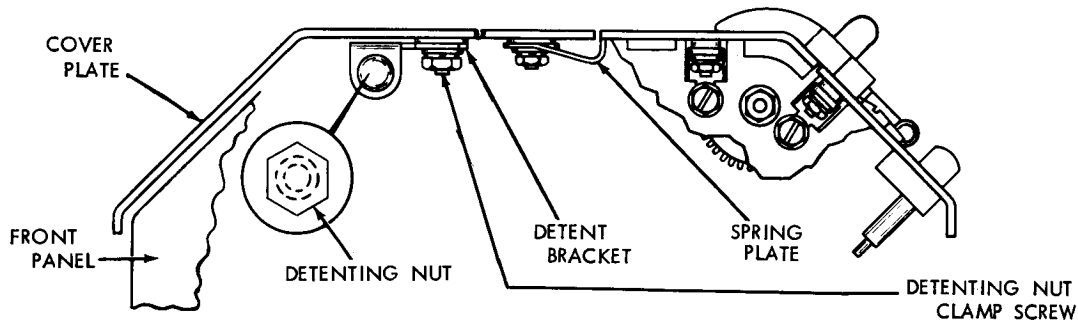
TOP PLATE AND COVER PLATE MOUNTING
